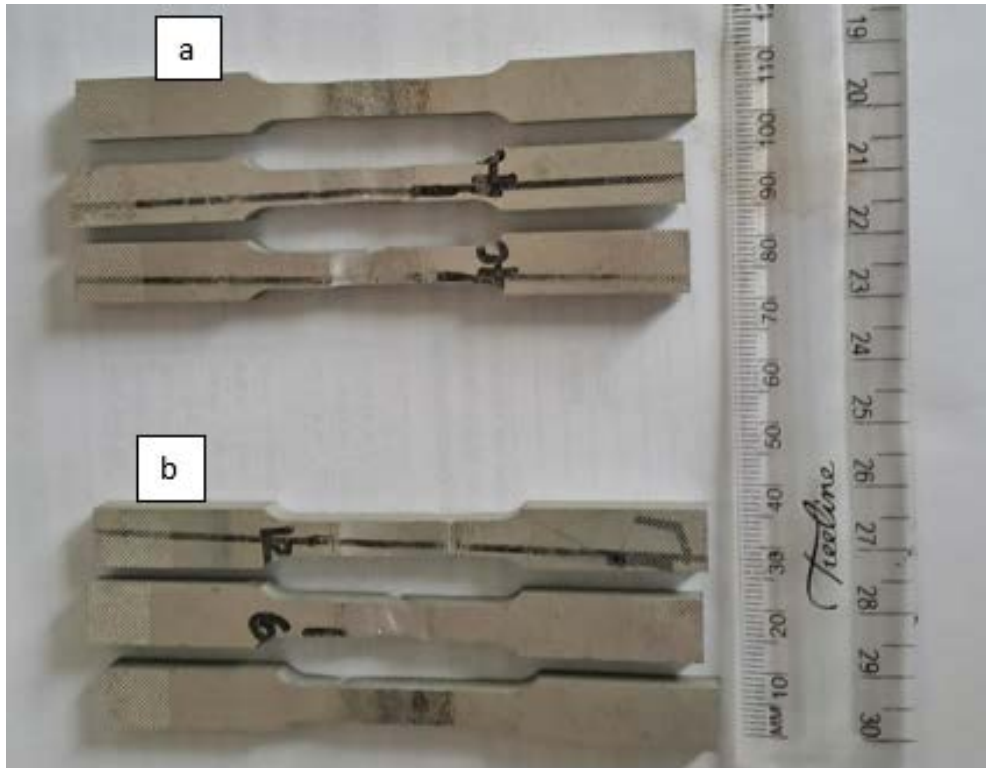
Tensile specimens (a) Sample welded at 500 rpm (b) Sample welded at 650 rpm
